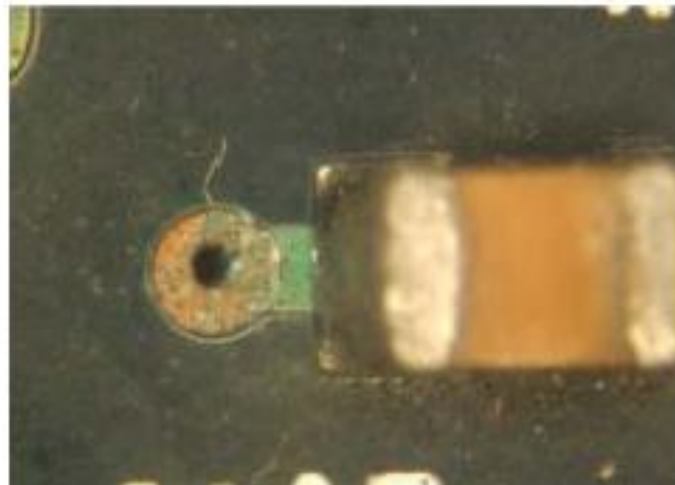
Plated hole corrosion due to magnesium chloride [6]
